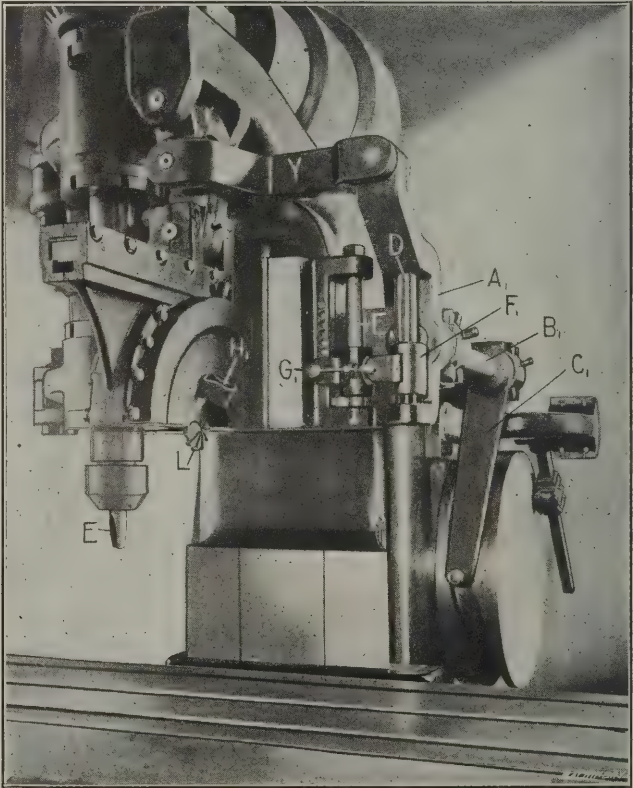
Front View showing Relieving Mechanism for the Die-sinking Cutter
